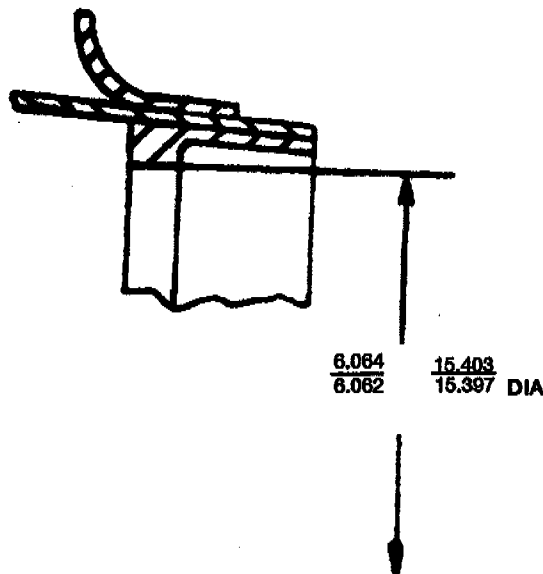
Exhaust Diffuser Spray Repair Surfaces.
